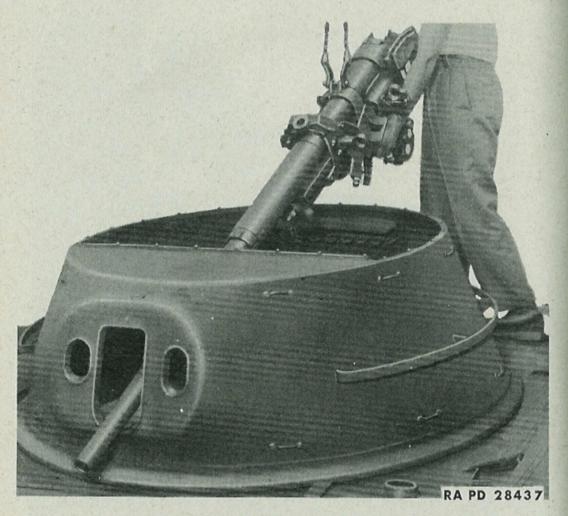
Guiding 37-mm Gun Through Opening in Turret
